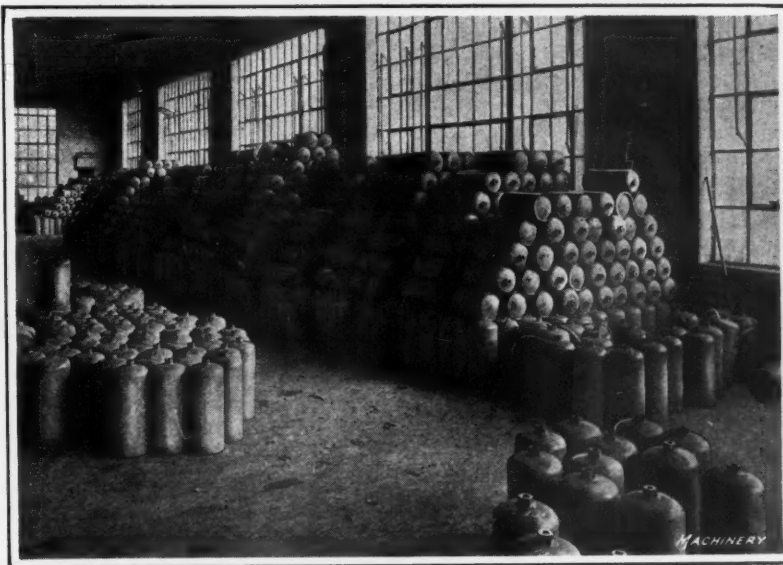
A Few of the 25,000 Gas Tanks which were welded by the Oxy-acetylene Process
